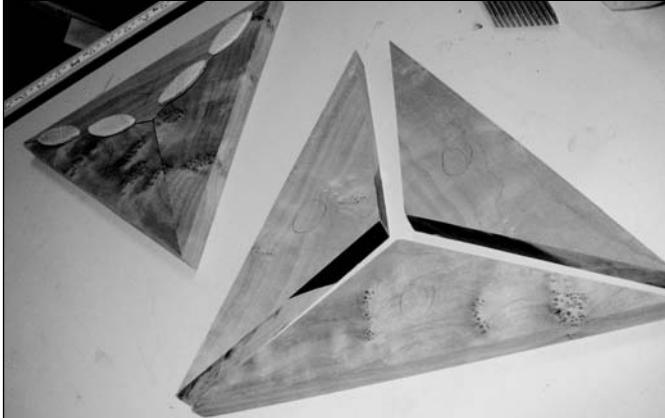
COMPLETED CAP PIECE AND THE POSITIONING DOWELS ON THE CABINET PILLARS.
